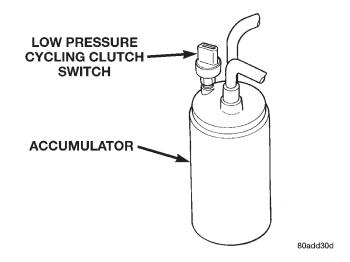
Low Pressure Cycling Clutch Switch - Typical
